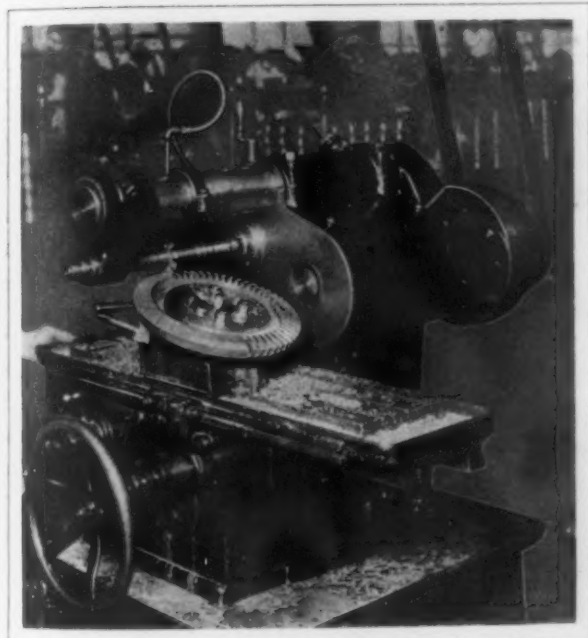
Cutting the Teeth in the Differential Bevel Gear Blank on a Horizontal Spindle Milling Machine
